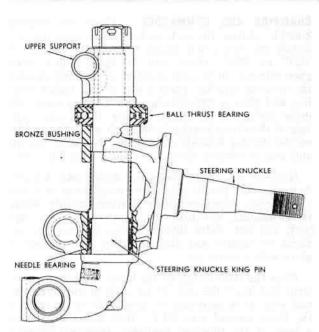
Construction of the Champion STEERING KNUCKLE
